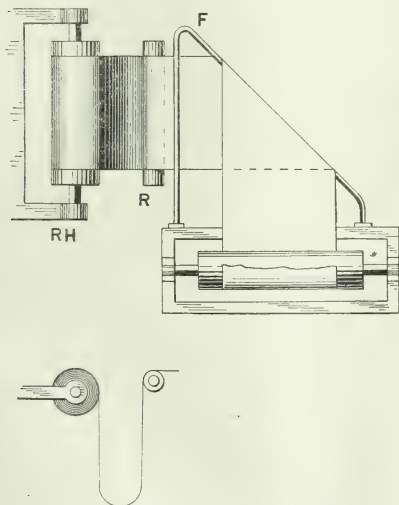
Form of paper blank and carriage to give freedom of movement to printer platen.
